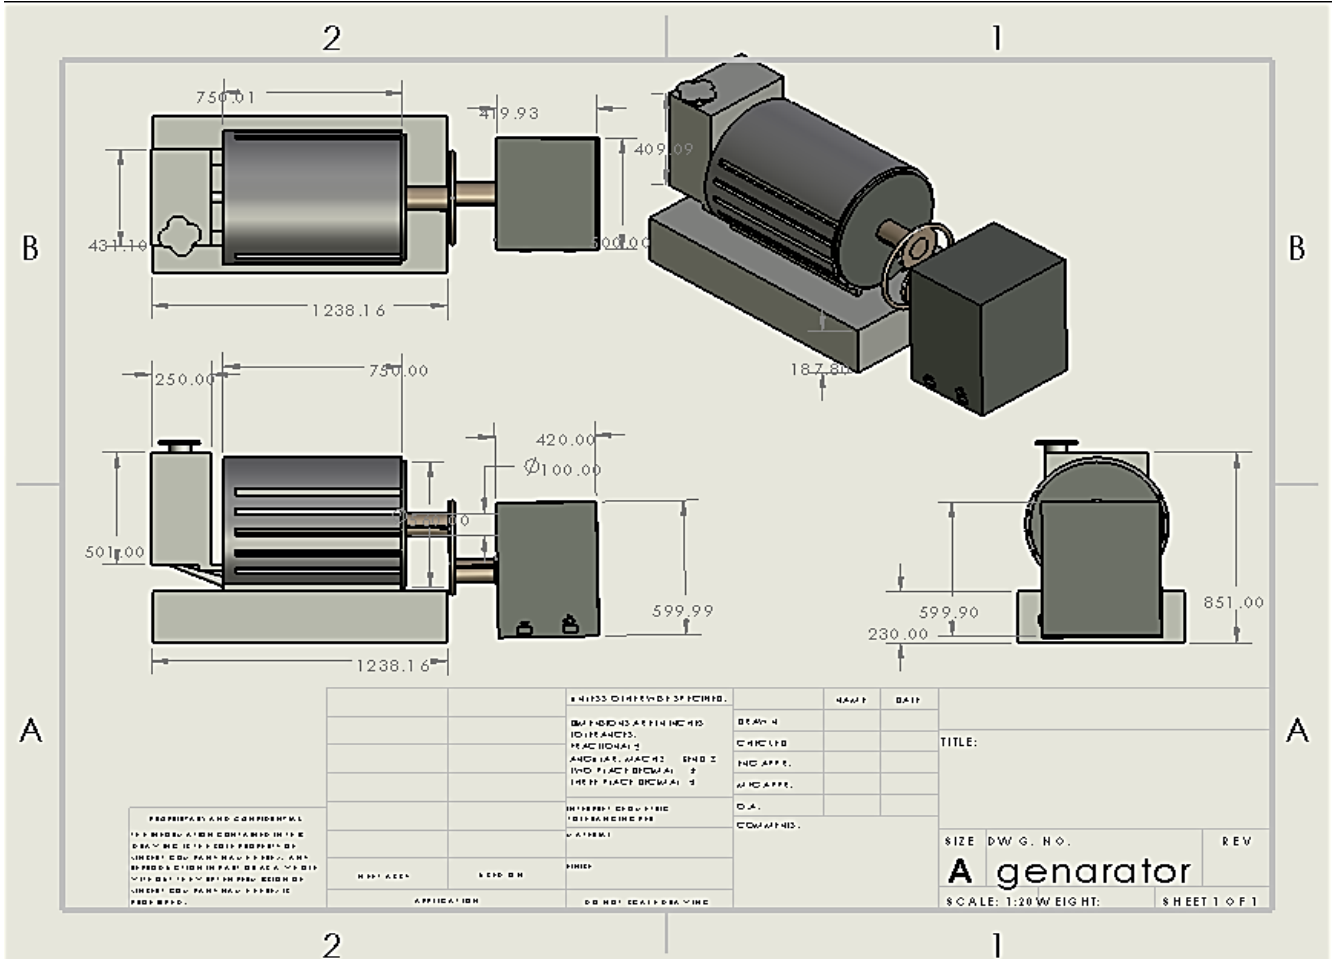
Drawing of the generator with dimensions (mm) (*SolidWorks CAD*)
